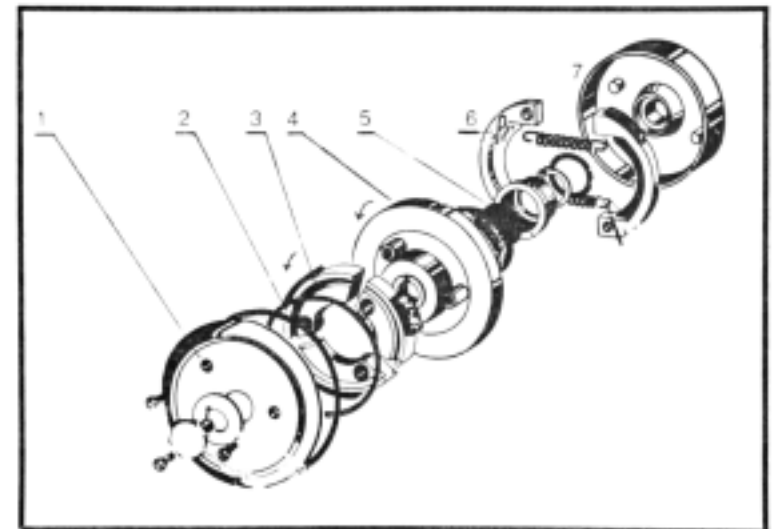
The Jawa clutch is tucked neatly under the flywheel. 1-flywheel; 2-garter (shoe-return) spring; 3-drive clutch shoes; 4-segment carrier; 5-sleeve; 6-starting shoes; 7-clutch drum.
